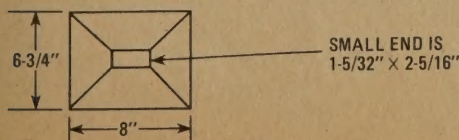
FEED-HORN DIMENSIONS. Use these to build your own horn from sheet metal or a similar material.
